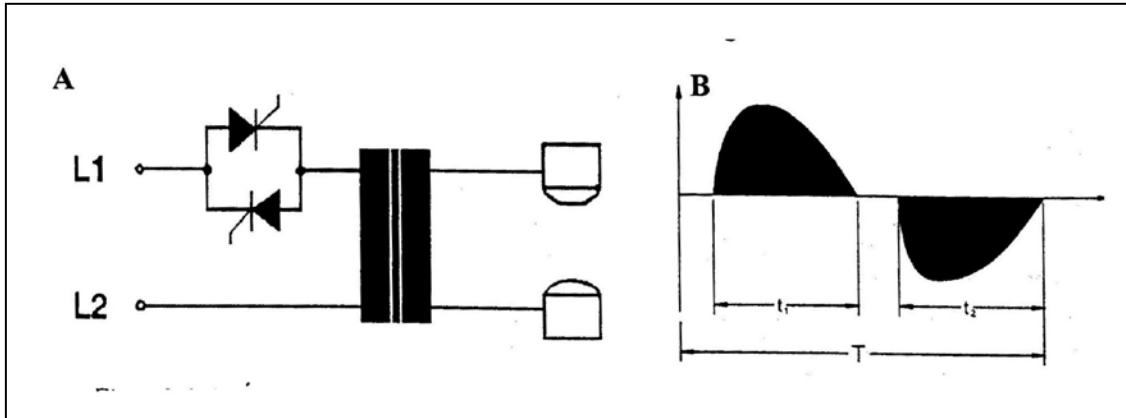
A — Sketch diagram of electrical circuit of single-phase AC machine; B—Welding current profile of single-phase AC machine.
